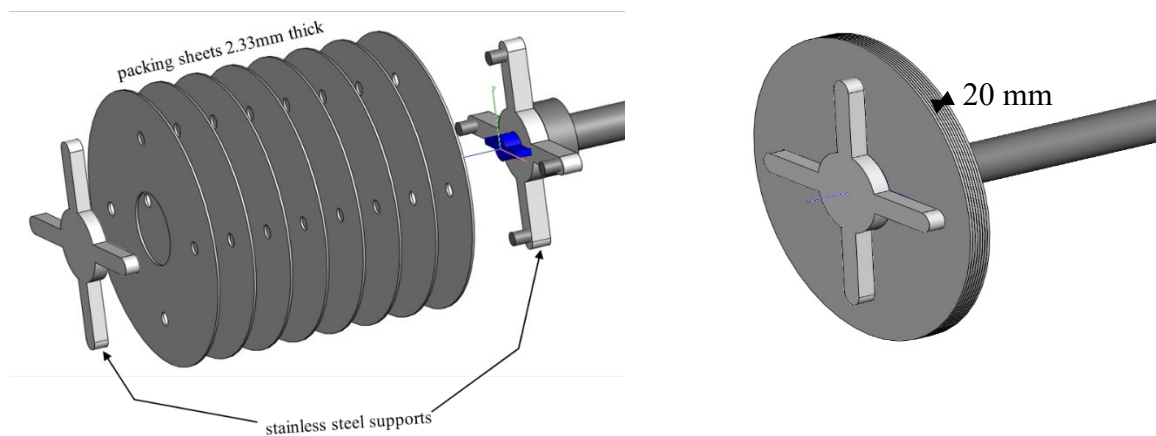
(a) Exploded view of cross-flow RPB packing (b) The cross-flow RPB rotor
